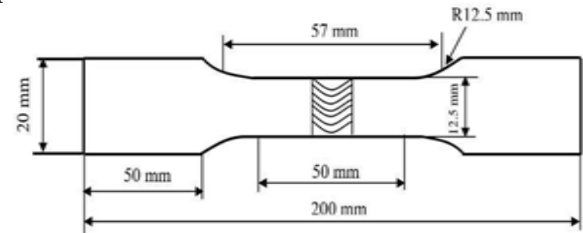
Details of the Dimensions of the AISI 1060 Steel Material Specimen
